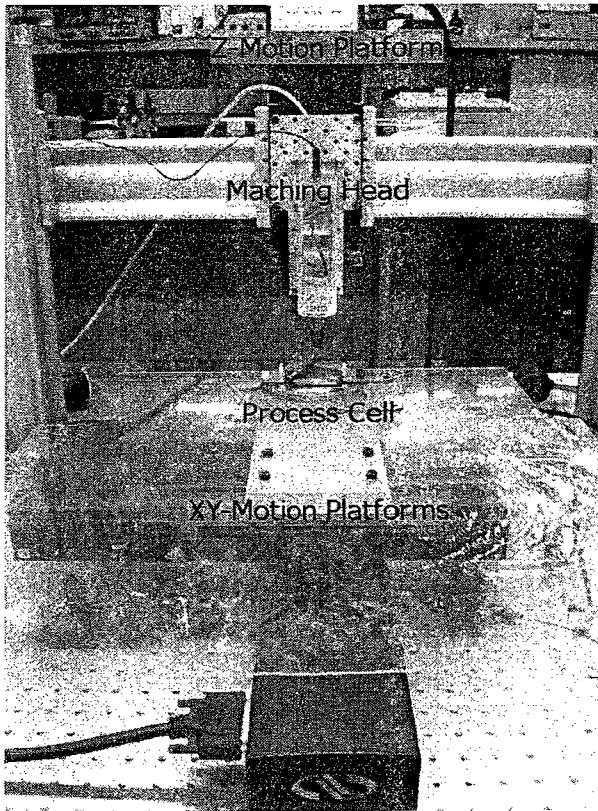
The SACE machining set-up. The process cell, where machining takes place, is mounted on a set of xy-motion platforms. The machining head, which is what the tool electrode is attached to, is fixed to a vertical motion platform.
